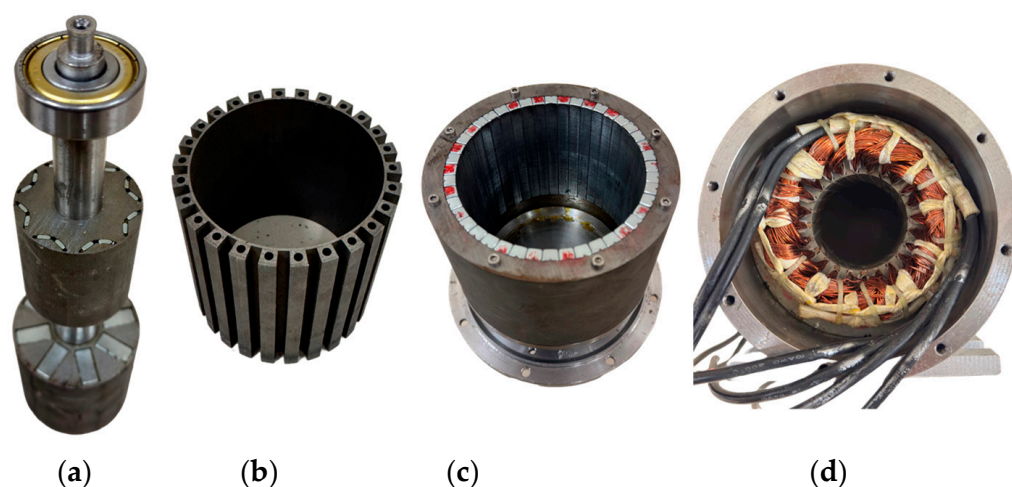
Fabricated mechanical parts of the proposed IGDU: (a) common shaft consisting the IPM rotor and HS rotor, (b) modulation ring, (c) LS rotor, (d) stator and housing.
